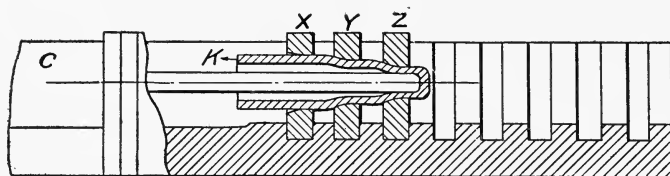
Hot-Draw Bench for Elongating Cupped Discs.
